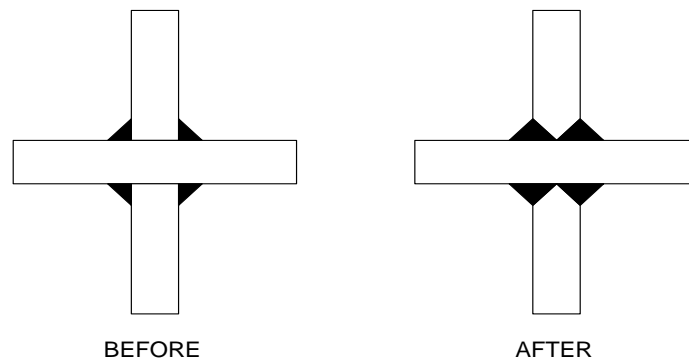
Illustration of a cross-junction before and after a full penetration fillet weld repair
